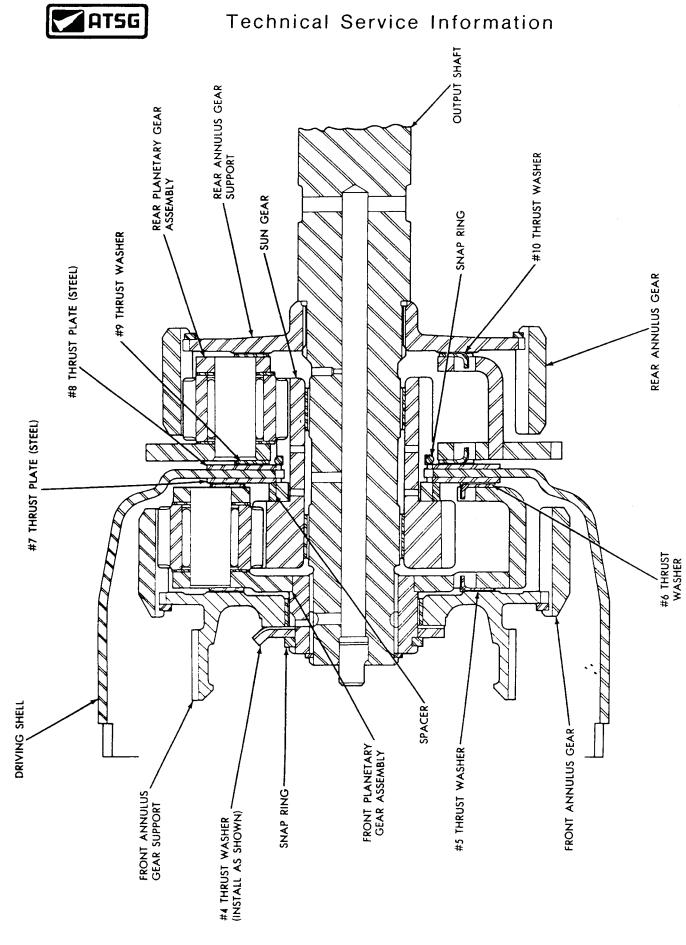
Wide-Ratio Planetary Gears Assembly (A-904T and A-999)
